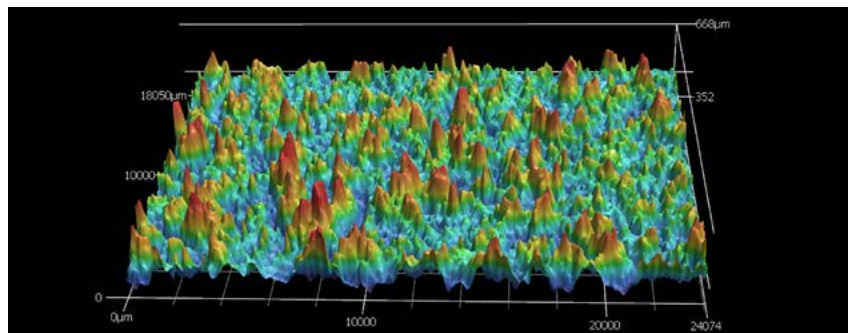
Inner surface of the casting (explosion-proof instrument housing) after removing the coated sand core.
